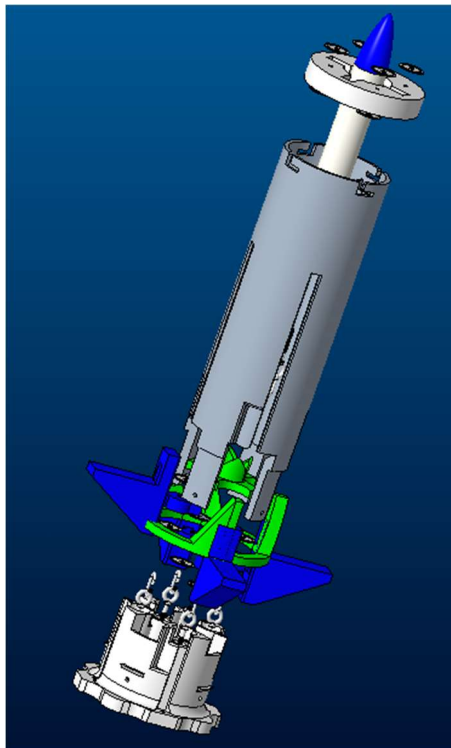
Development Model Full Assembly in ProE, Exploded View.
